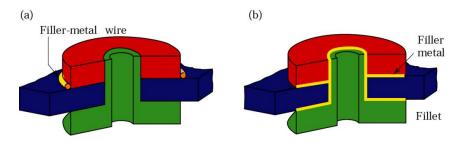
An example of furnace brazing: (a) before, (b) after. Note that the filler metal is a shaped wire.
